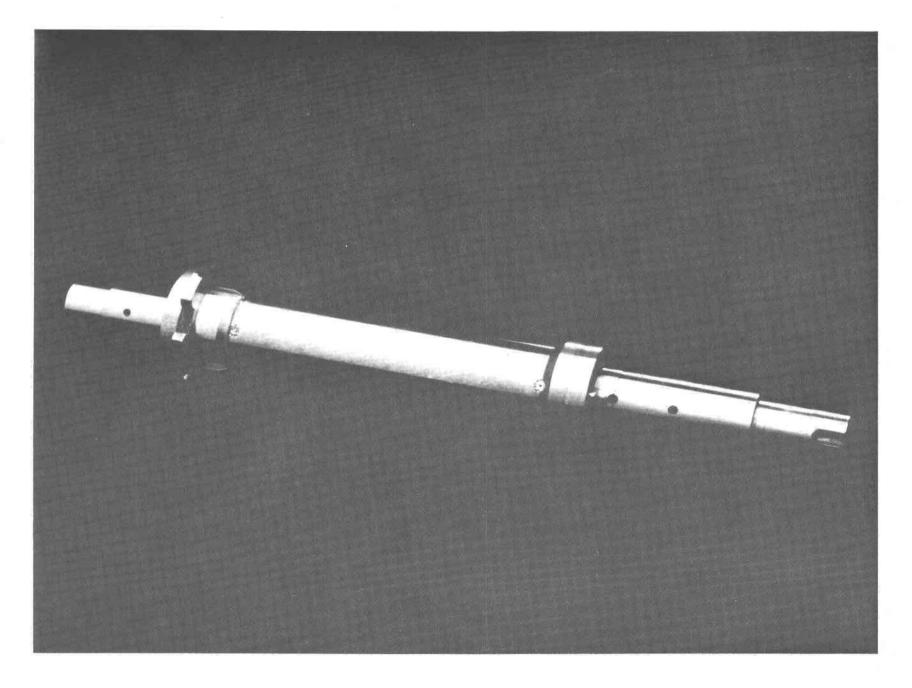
Shaft Showing both Rotor Coolant Holes Plugged and a Single Bleed Hole in One Plug
